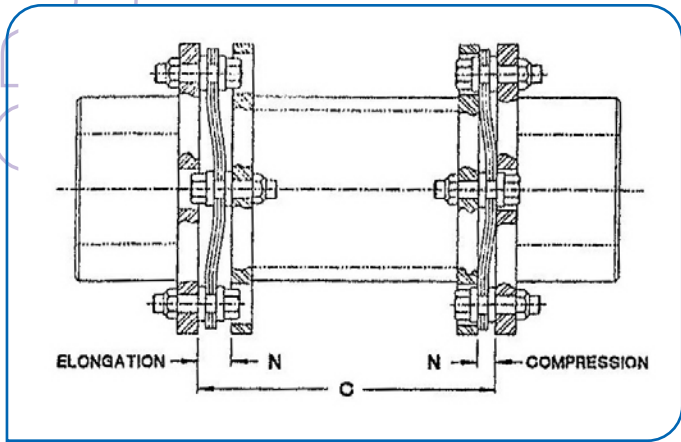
Wavy disk packs on both ends of the coupling. One end is compressed, and the other is elongated.
